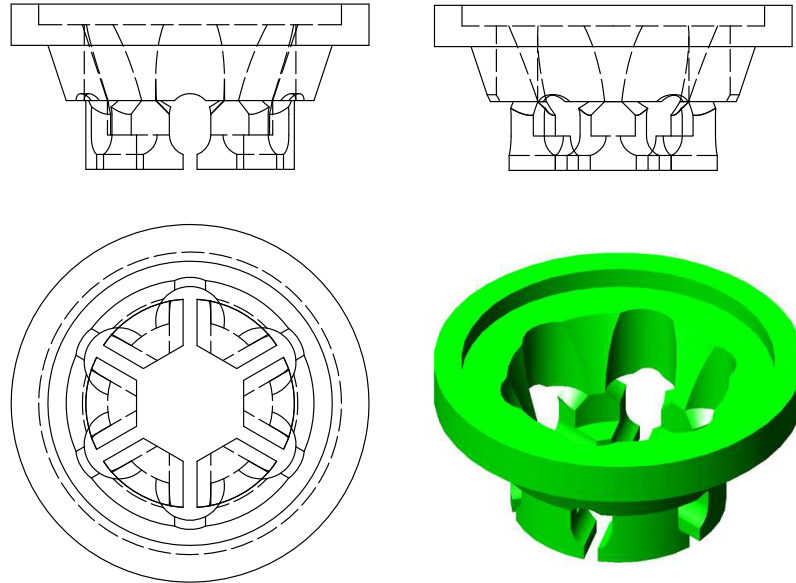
Drawing of the die struts part (Version 1.2).
